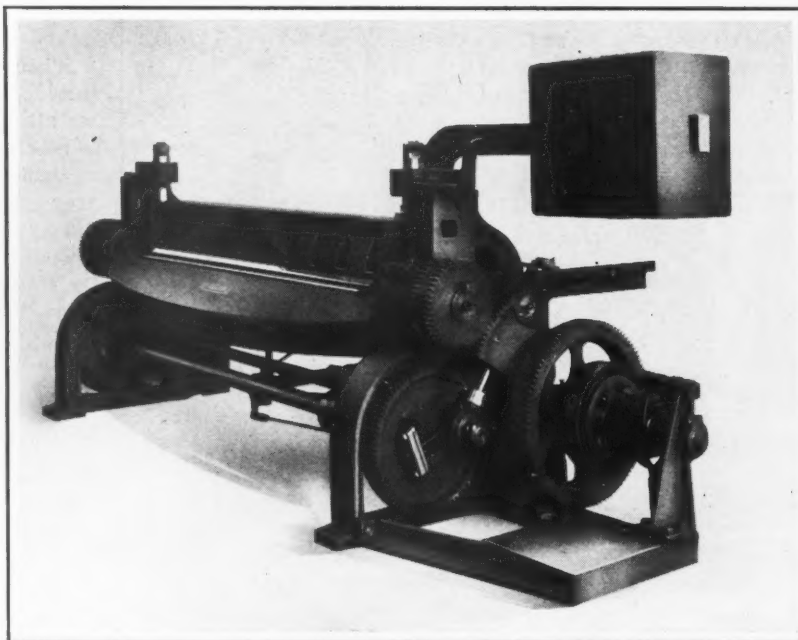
Rear View of the Folder and Brake, showing the Drive
